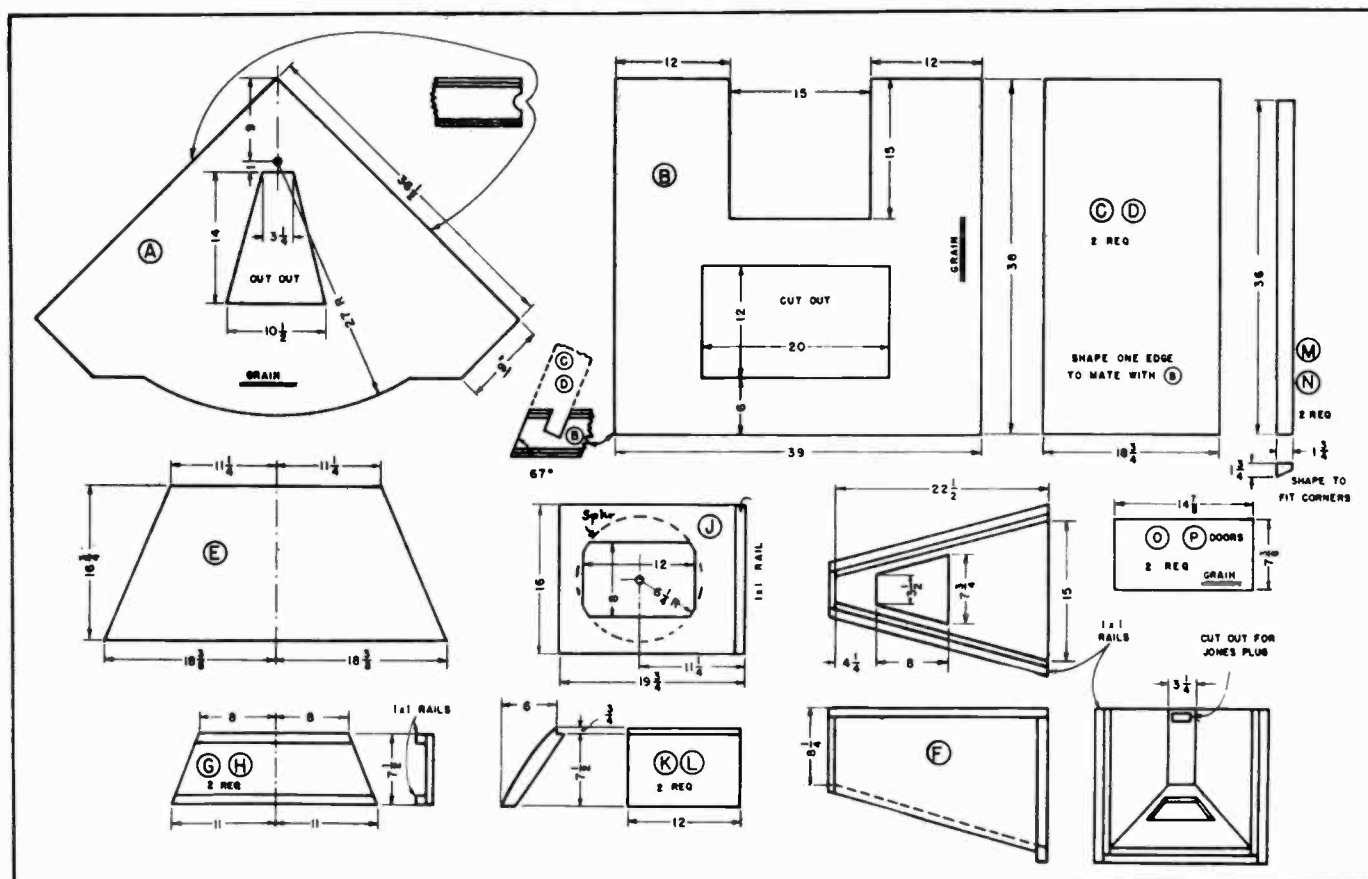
Details of the pieces which comprise the lower cabinet, speaker well, and tube enclosure.
